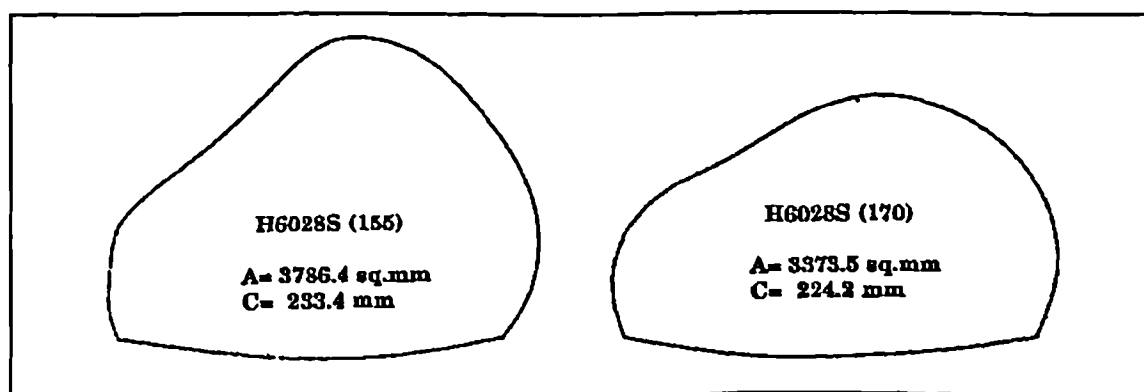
(B): EXAMPLES OF TWO LAST (H6028S) CROSS-SECTIONS.
